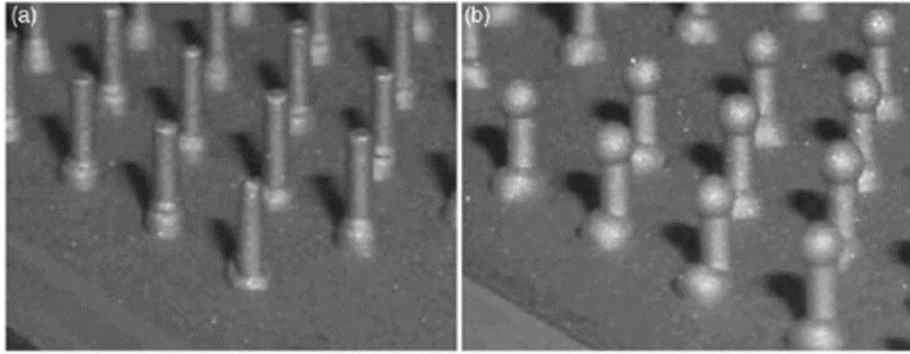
Pins produced by cold metal transfer [25]. a) cylindrical pins b) ball-head pins
